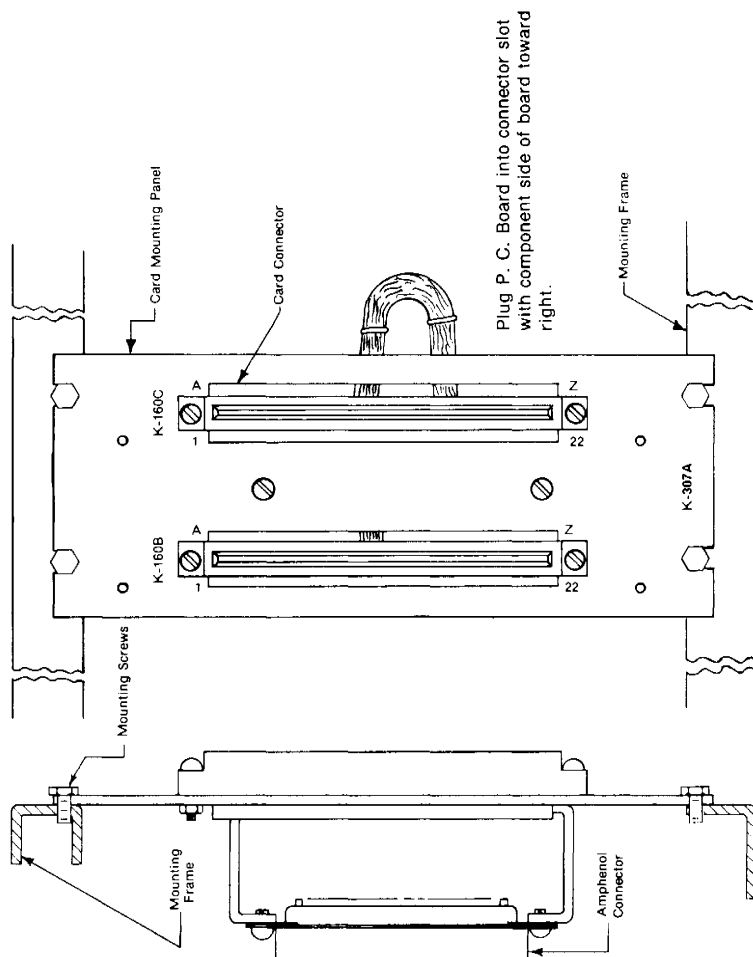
Install K307A Mounting Panel to front of KSU mounting frame.
